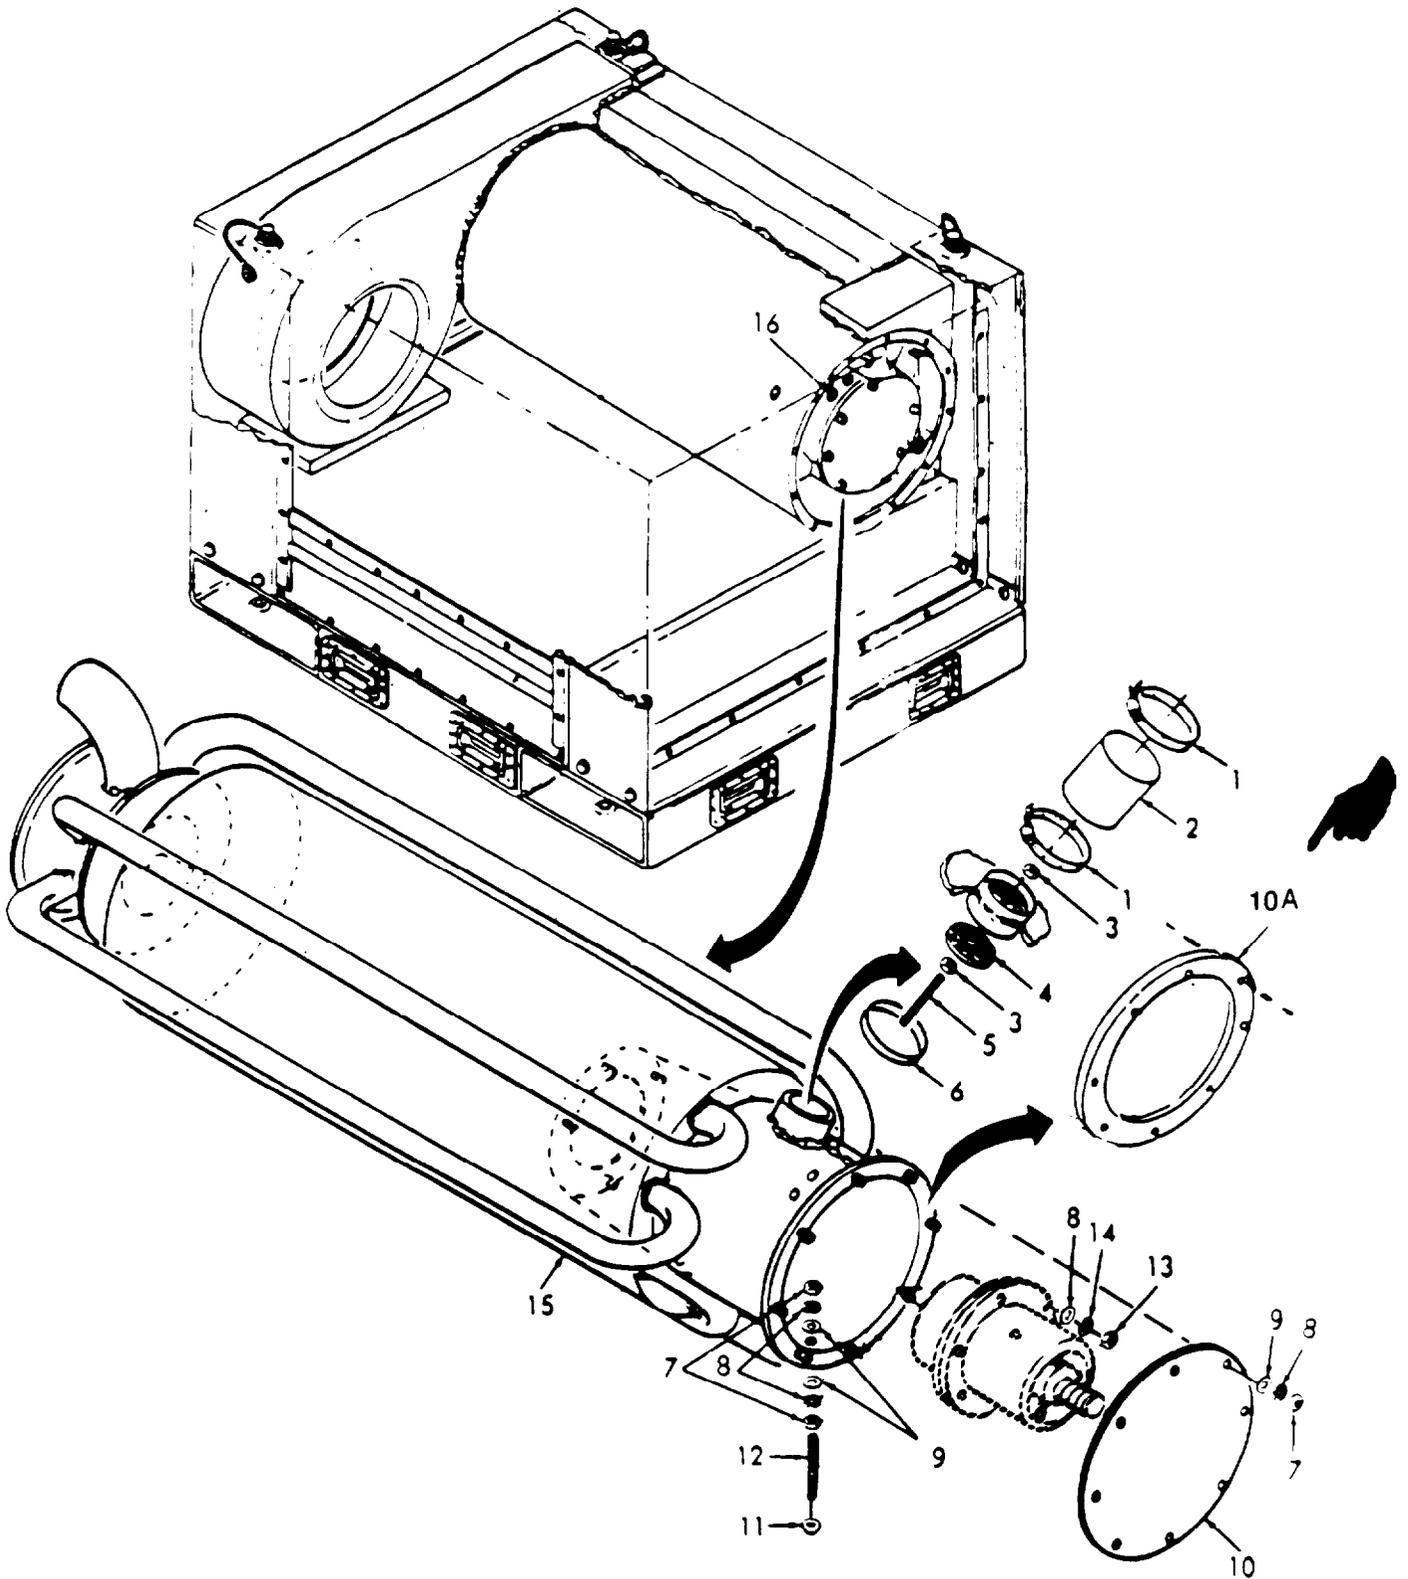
Heat Exchanger Assembly (Sheet 1 of 2).
